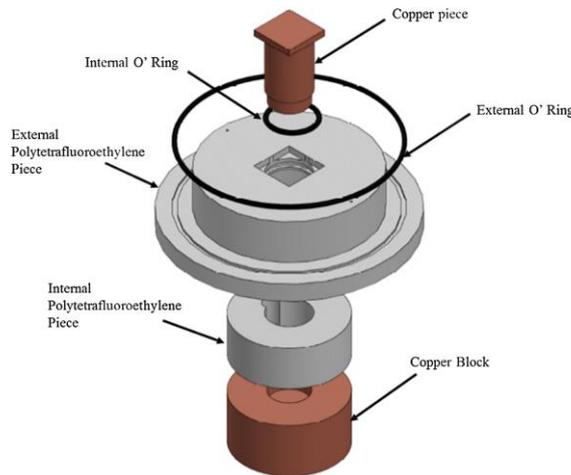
Exploded view of the test section (Kiyomura et al., 2020).
